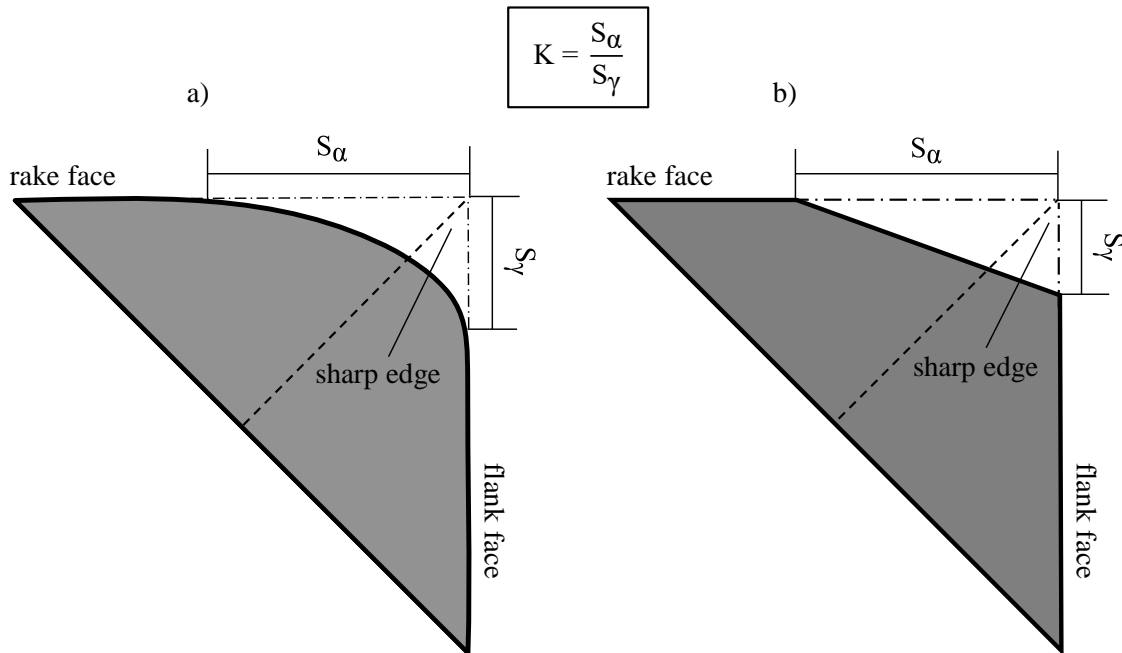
Cutting edge form factor K according to DENKENA et al. [17]; a) rounded cutting edge geometry; b) chamfered cutting edge geometry
